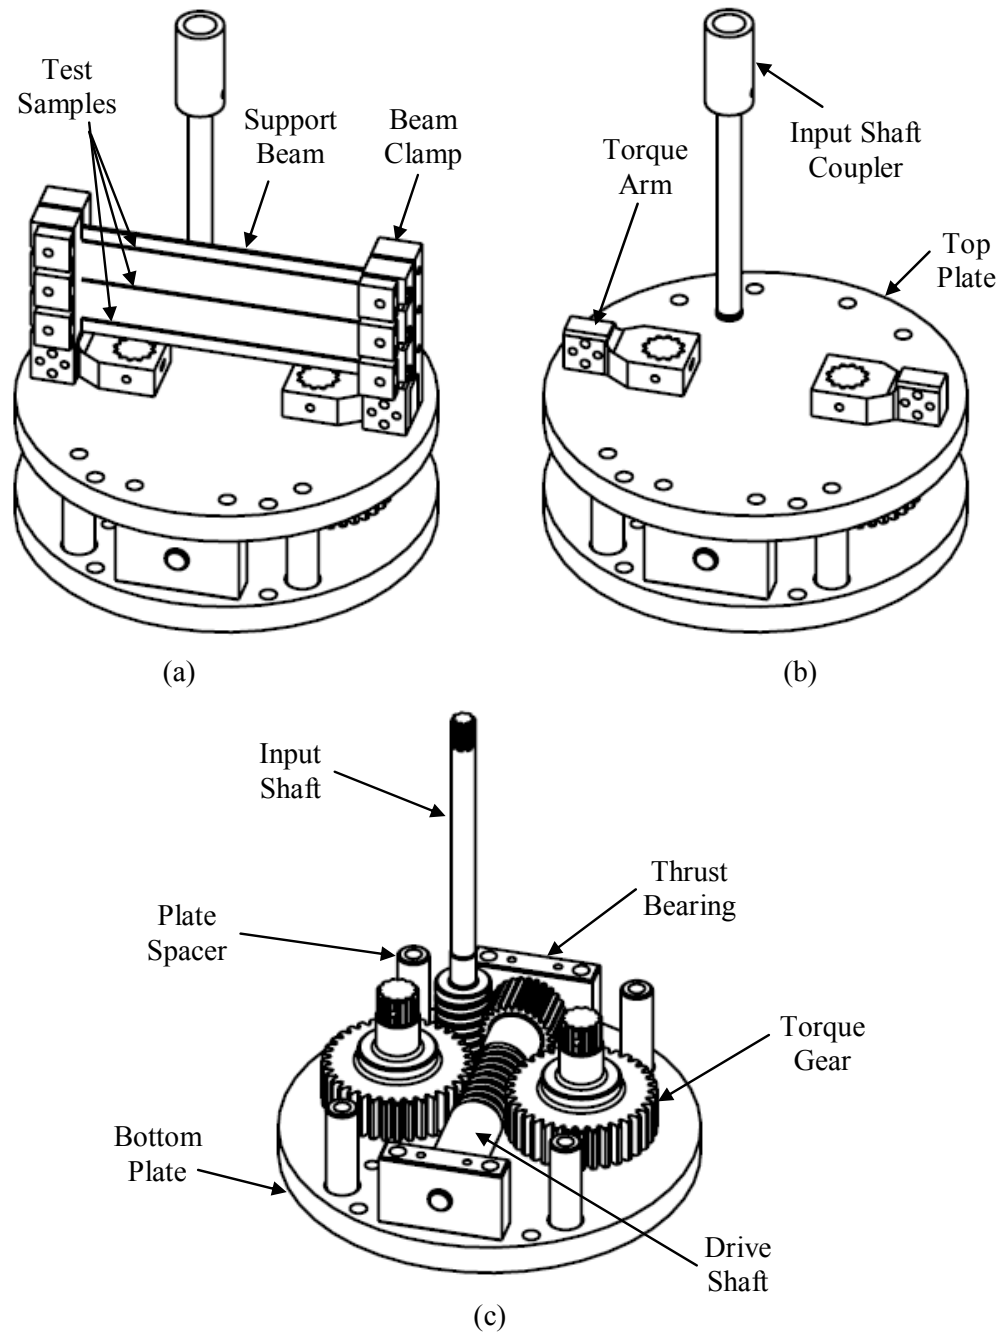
Pure bending device components: (a) complete mechanism, (b) with strand mounting system removed, and (c) inner gear train [2.12].
